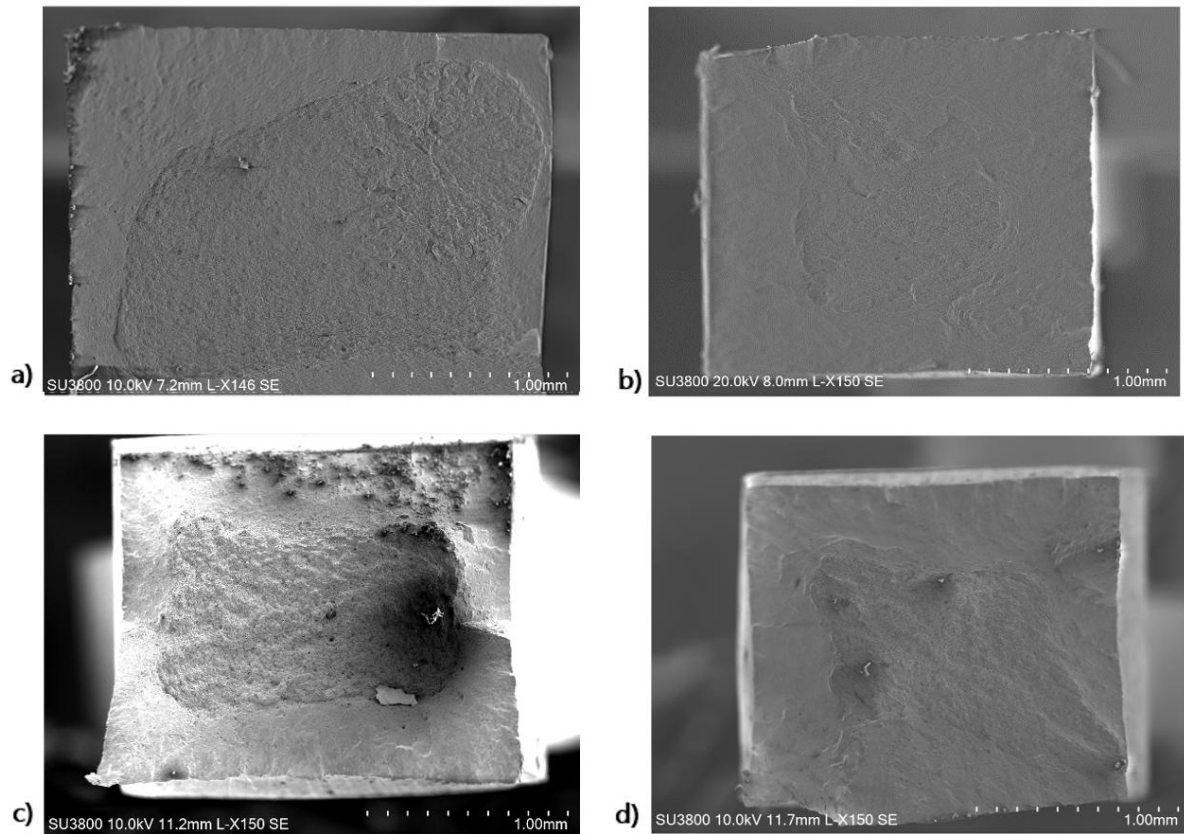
Fracture surface of tensile samples at low magnification: a) Sample 13, b) Sample 7, c) Sample 8, d) Sample 5
